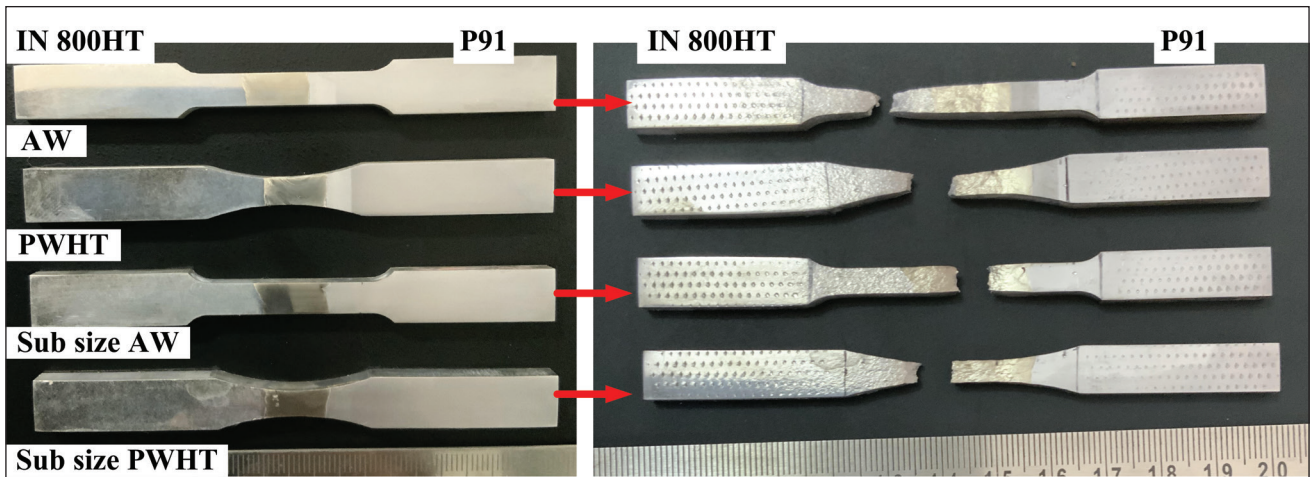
Prepared tensile specimens and fractured tensile specimens after testing.
